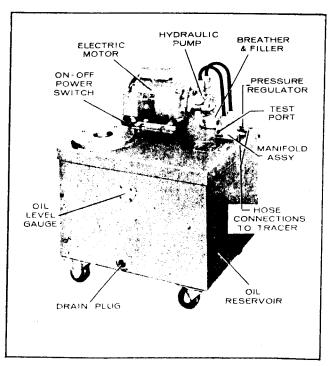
Typical Hydraulic Power Unit Used With Mark Series Lathe Tracer Attachments
